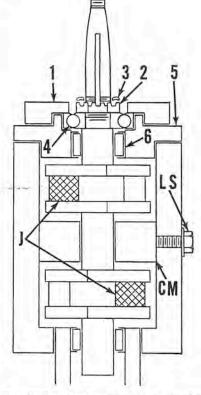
Schematic view of crankcase showing method of removing and installing crankshaft, Refer to text,
